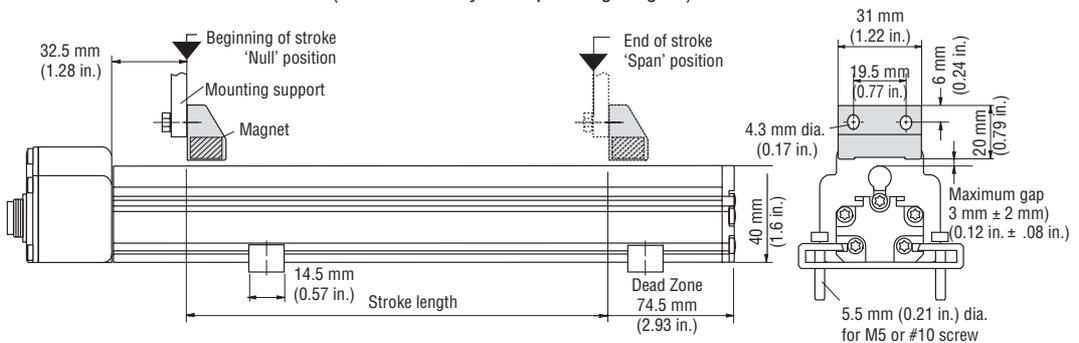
E-Series Model EP sensor dimension reference (Shown with Style L Block magnet)
